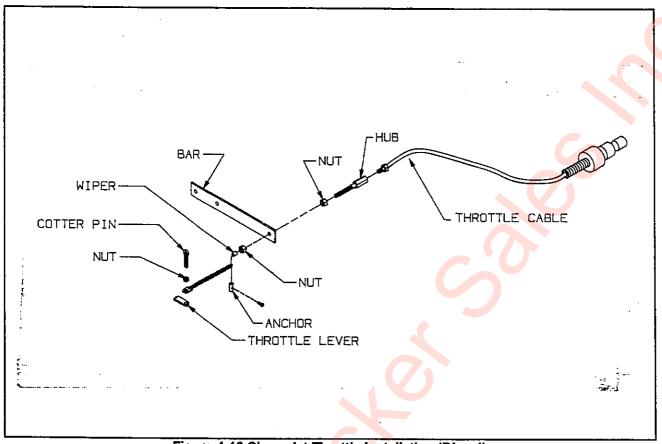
Chevrolet Throttle Installation (Diesel)
